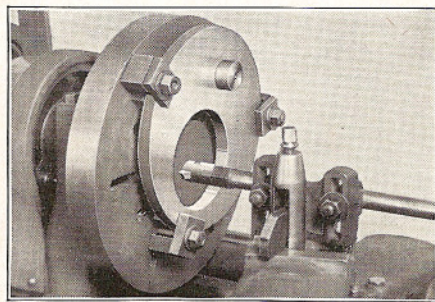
Boring an Eccentric in Work on Face Plate of the 9-inch Toolmaker Lathe.
